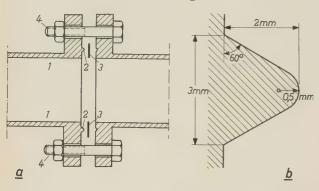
Flanged joi nts between tubes in a metal vacuum system a) The flange on tube l bears a circular ridge 2 immediately opposite a circular score in the flange of the other tube. The packing 3 is of copper and is about 0,3 mm thick. The flanges are drawn together by a ring of bolts with a spacing of 2 to 3 cm. b) Section through the ridge 2.
